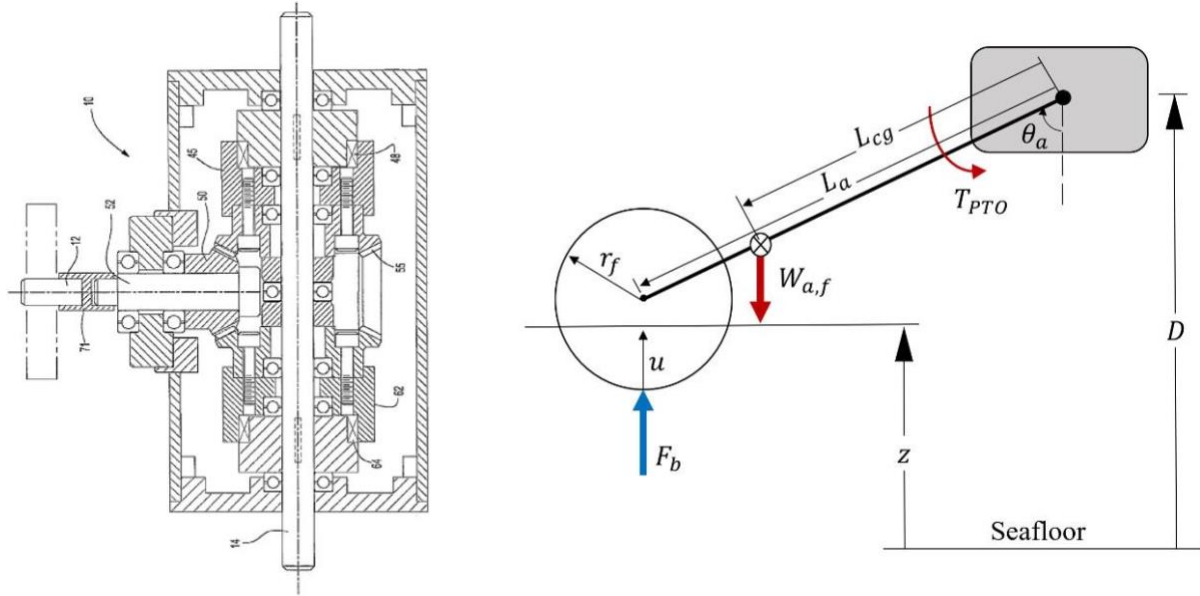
Left: Section view taken from the Oscillo-Drive patent; Right: Force diagram of WEC
